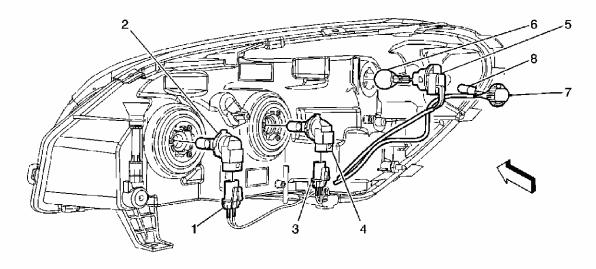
View Of Headlamp Bulb (w/o Cornering Lamp)
